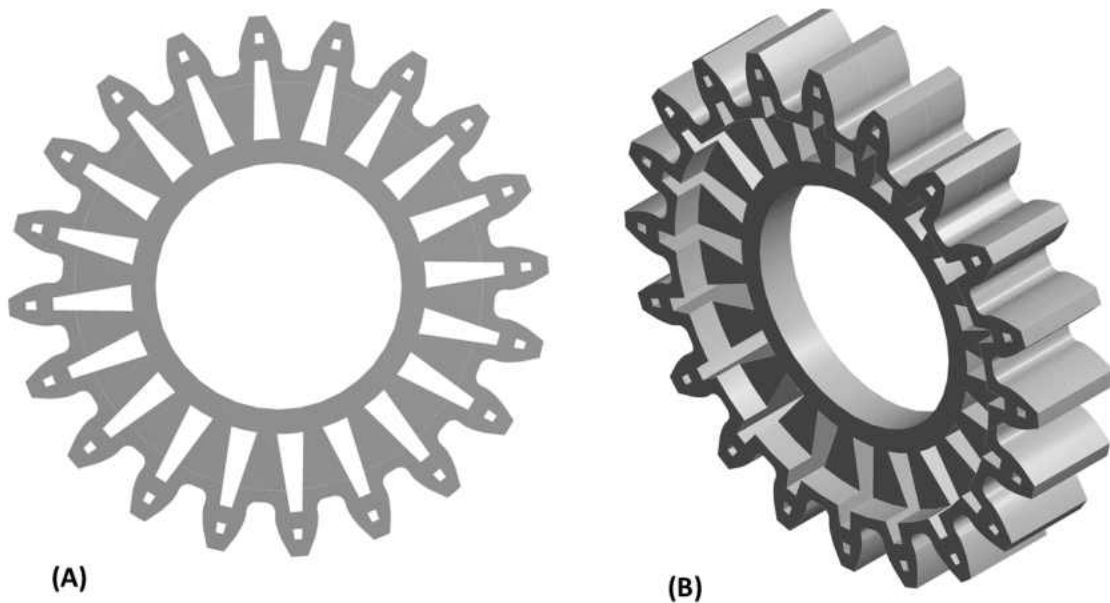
Hollow Gears or Truss Reinforced Gears (TRG). (A) Front View of TRG (B) Isometric View of TRG.
